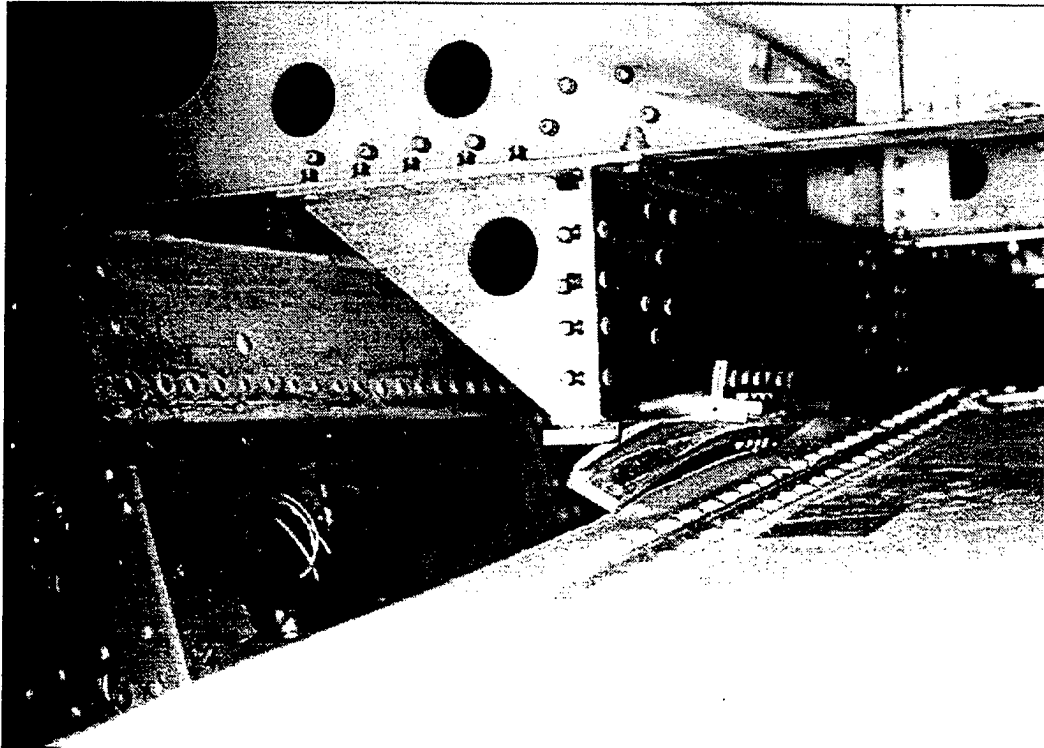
POSTTEST AUXILIARY FUEL TANK RIGHT ATTACHMENT
